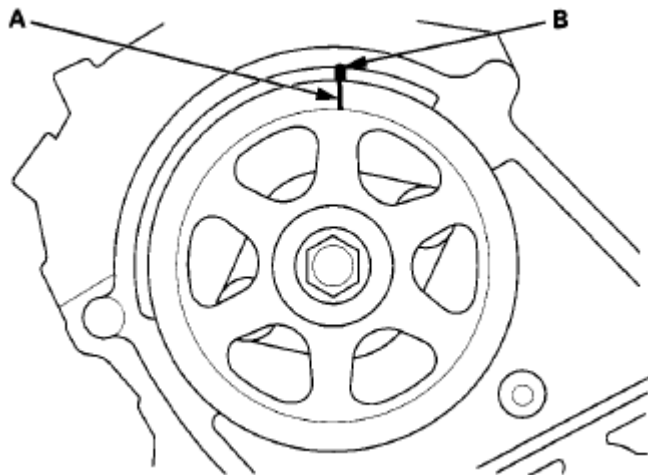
Setting Camshaft Pulleys To TDC By Aligning TDC Marks On Camshaft Pulleys With Pointers - Rear
